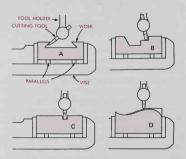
Cuts that can be made on a shaper: (A) Angular cuts; (B) Horizontal; Vertical, and Angular cuts; (C) Slotting cut; (D) Simple form cutting.
